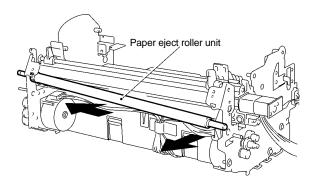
Removing the Paper Eject Roller Unit (2)
